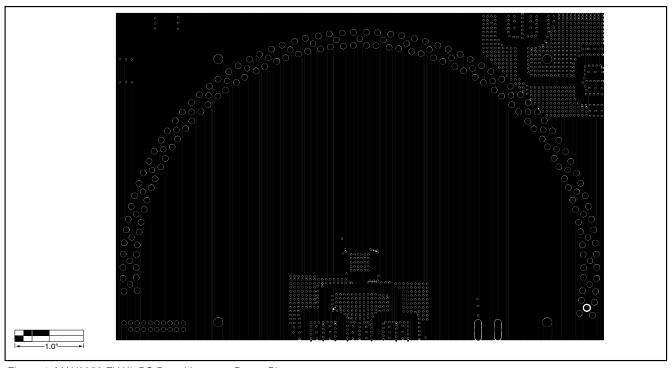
MAX3950 EV Kit PC Board Layout—Power Plane
